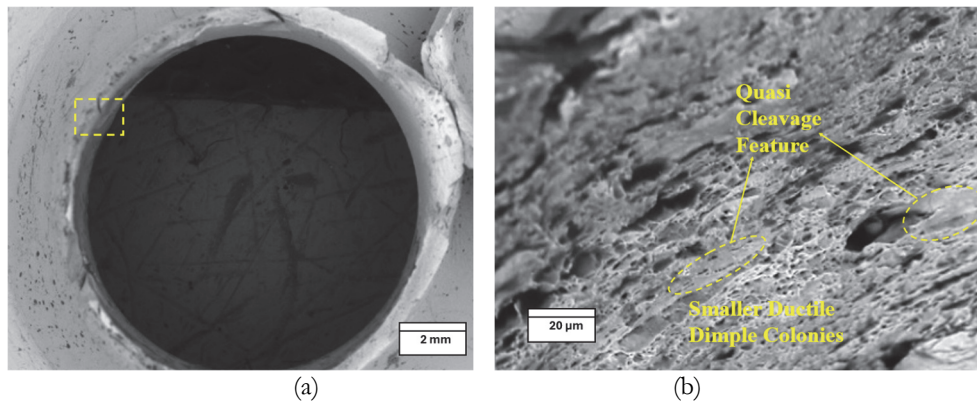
Fractographic examination of the fracture surface of 8% pre-strained specimen
